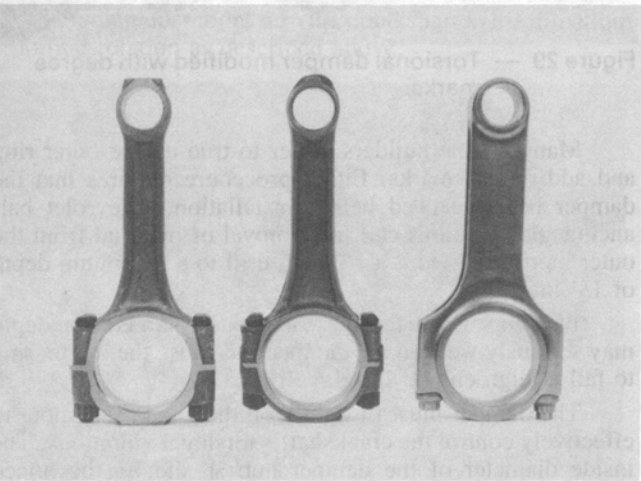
Production forged steel rod (left) has 9mm bolts; small-block V8 rod (center) can be modified to fit V6/60 crank; aftermarket connecting rod (right) improves engine reliability in endurance racing.
